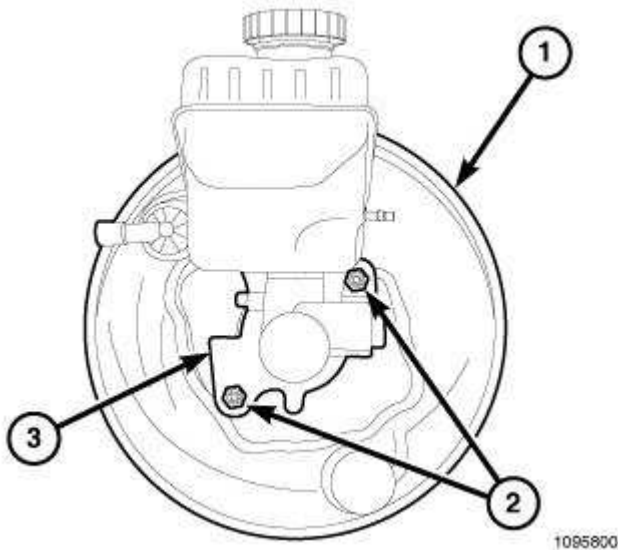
MASTER CYLINDER MOUNTING NUTS
